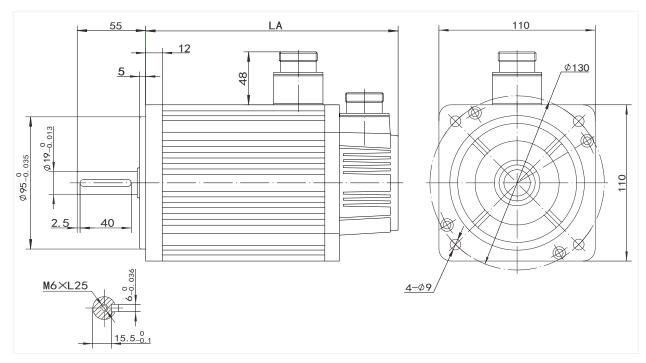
Installation dimension of WE series 110 flange servo motor
